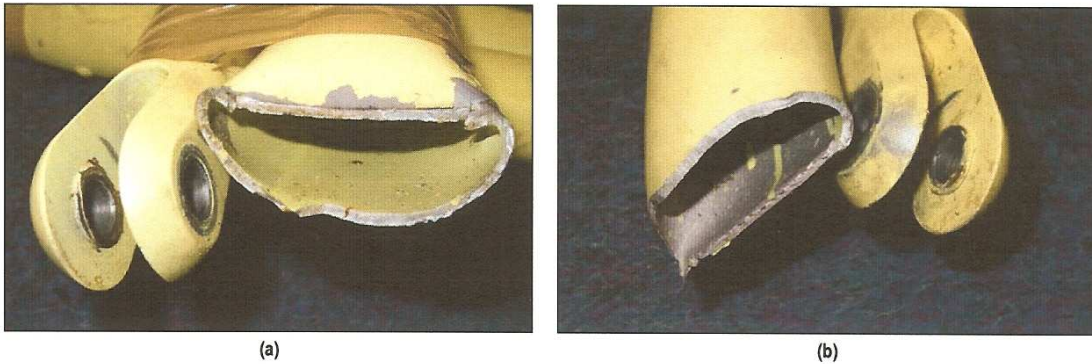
Enlarged views of the fracture surfaces of the (a) left hand support; and (b) right hand support (magnification: approximately 0,7x).
